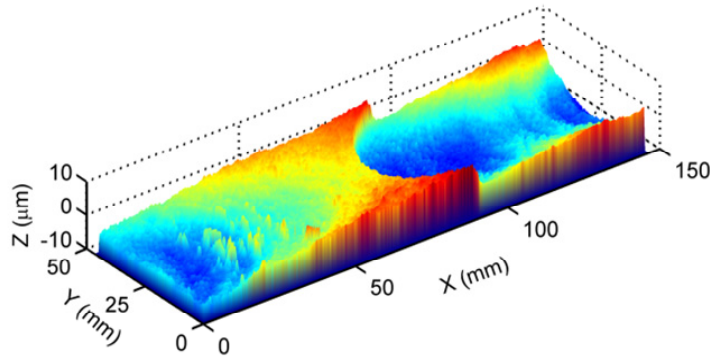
Gouging due to moving cutter in axial direction [66]
